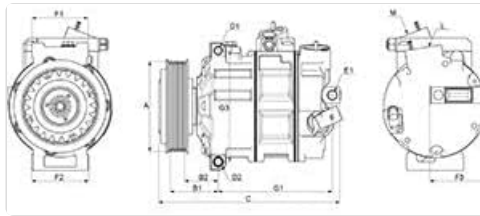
Multi-view technical drawing illustrating the overall dimensions and layout of the compressor.
